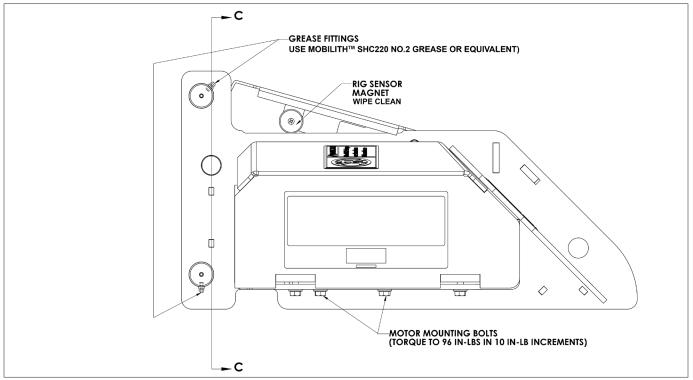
FIGURE AK—GREASE FITTING, RIG SENSOR MAGNET & MOTOR MOUNTING BOLT LOCATION
